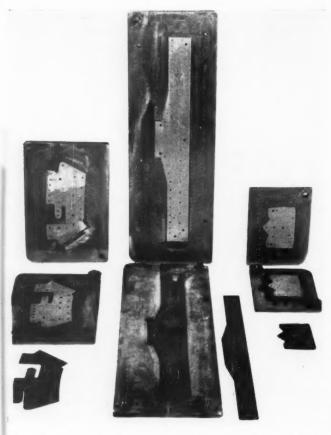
Reproduced photograph showing three blanks beside their respective template dies.
